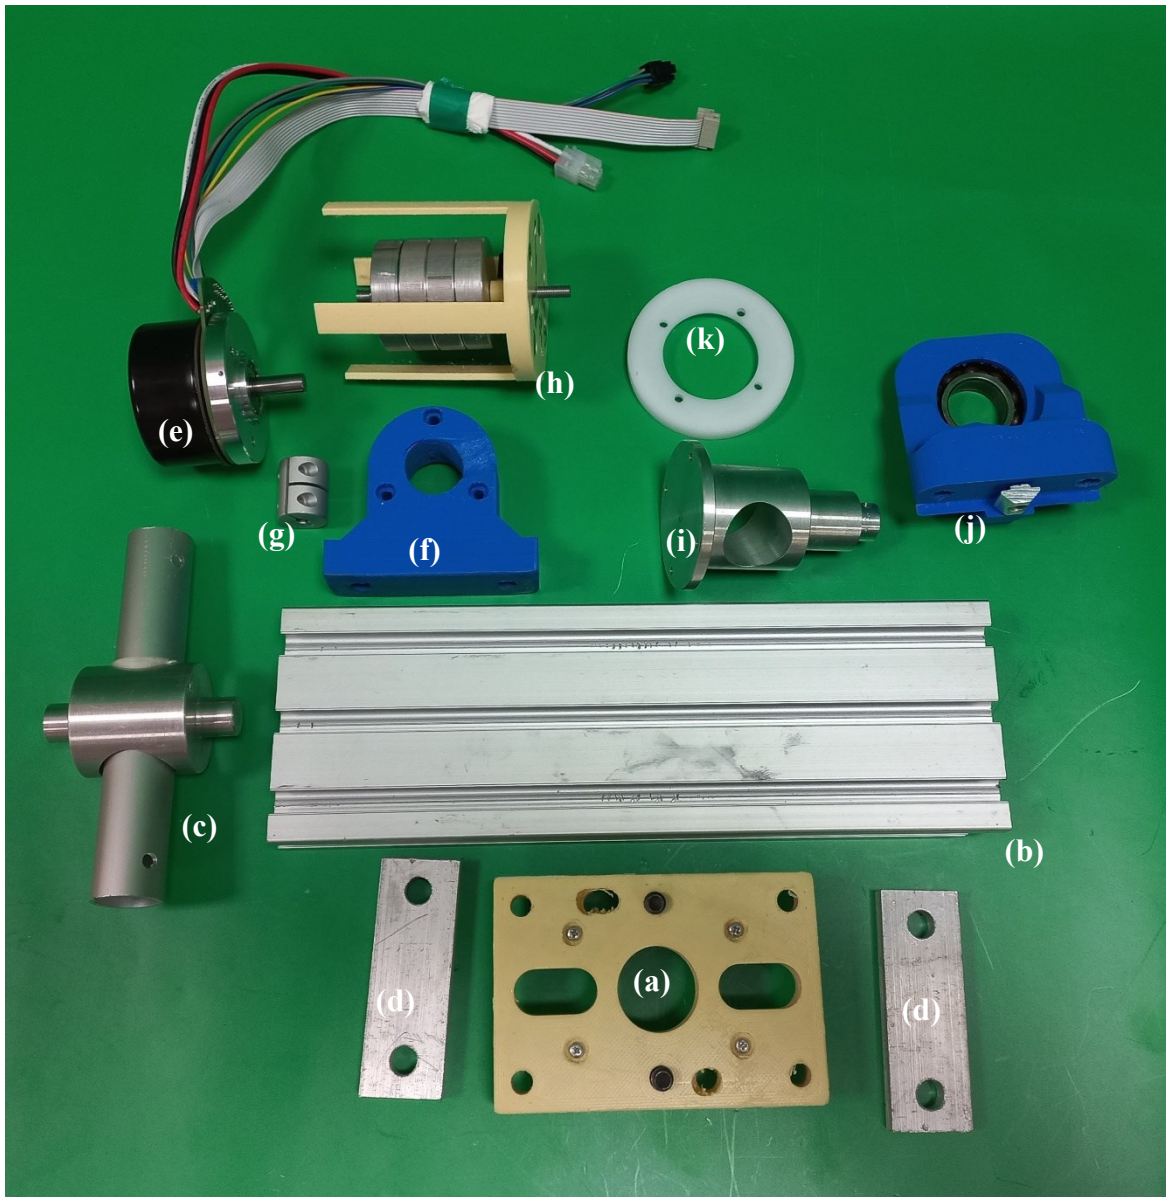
All parts of Base assembly (a) A1-1 frame connector, (b) A1-2 sigma profile frame, (c) A2-1 parallelogram shaft, (d) A2-5 lever for housings, I A3-1 first motor, (f) A3-2 first motor connector, (g) A3-3 first motor coupling, (h) A3-4 spring system, (i) A3-5 pantograph shaft, (j) A3-6 pantograph shaft housing, (k) A3-7 encoder adjacent wheel
